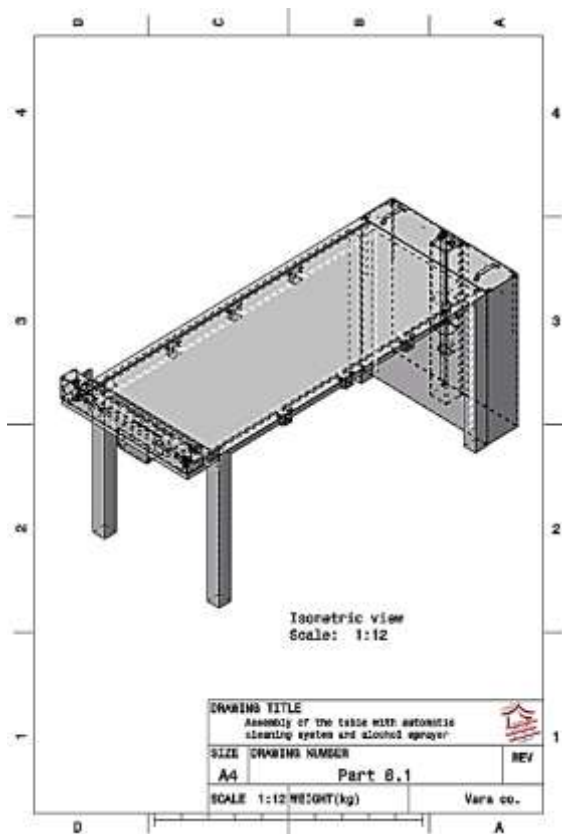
Assembly of the table with automatic cleaning system and alcohol sprayer
